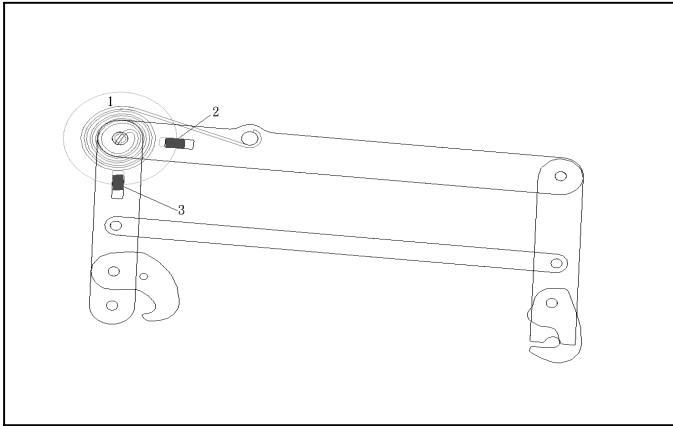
Locking Plate, Floating Link Lock and Front Leg Lock in the New Design
